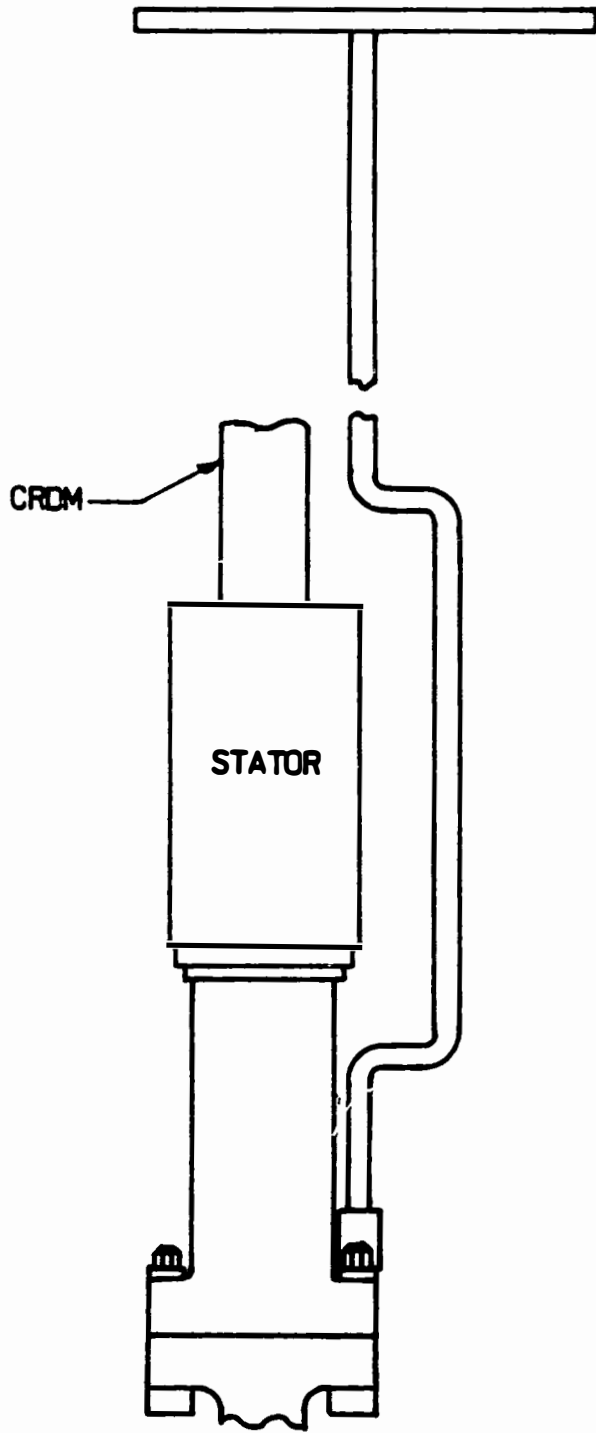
DOUBLE OFFSET FLANGE BOLT TOOL
